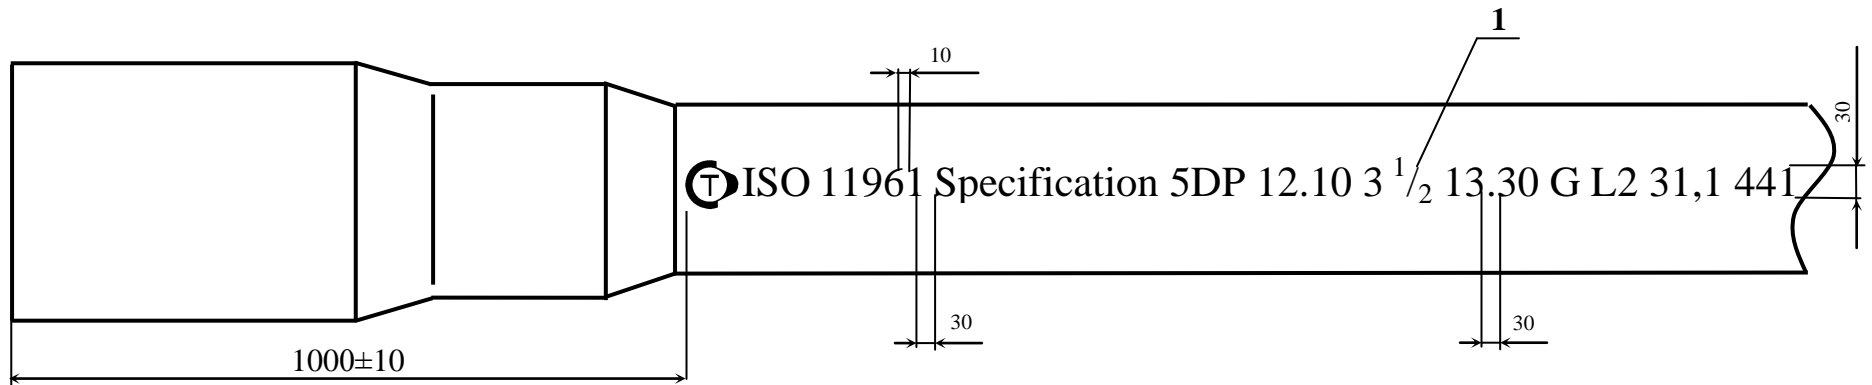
Die-stamped marking for drill pipe according to API Spec 5DP, (dimensions in mm)
